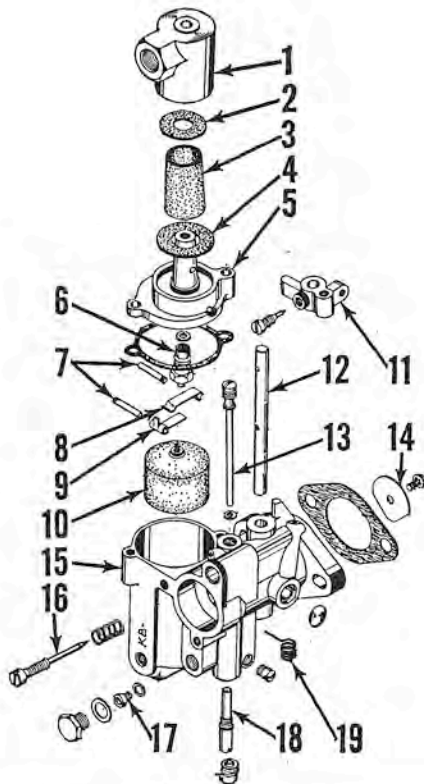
Exploded view of Tillotson carburetor of the type used.
